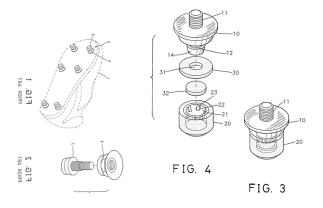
U.S. Patent US6442872B1, Shoe spike assembly having cushioning device (Google Patents, n.d.)
